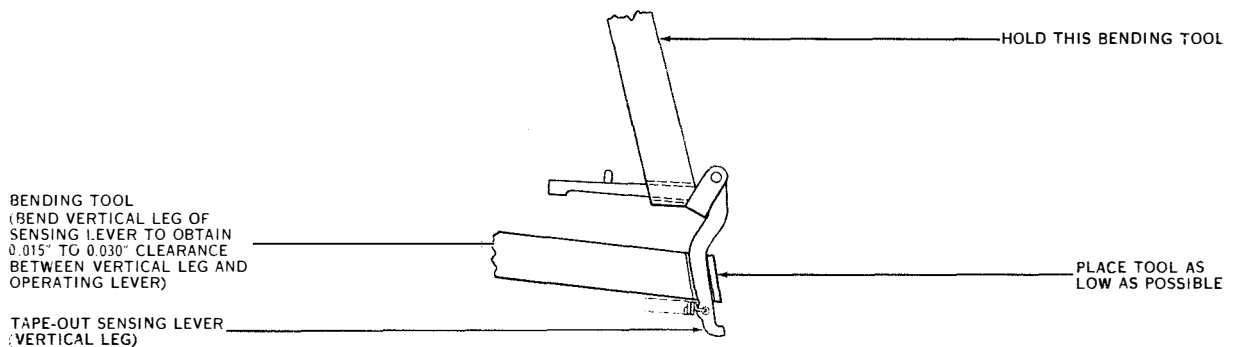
Placement of Bending Tool on Tape-out Sensing Lever (Vertical Leg)
